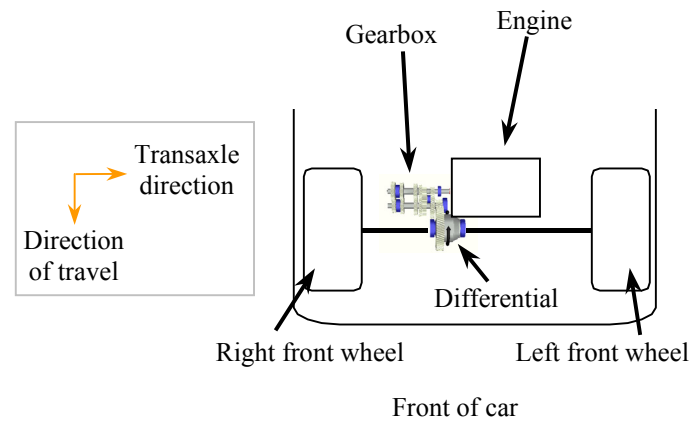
Sketch of front wheel drive passenger car layout, adapted from (James 2003)
